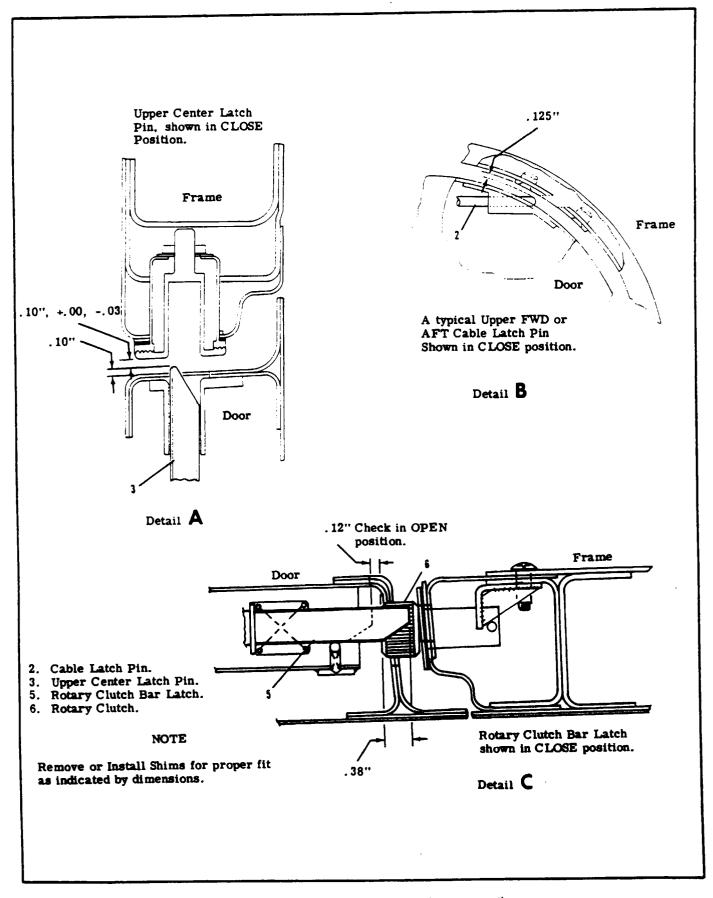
Door Latch Mechanism (Sheet 4 of 4).
